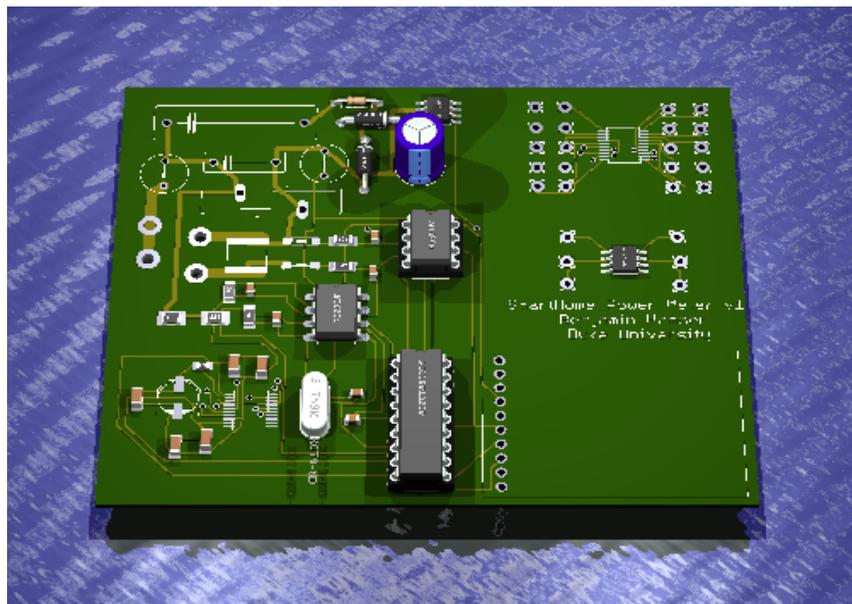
3-D rendering of the custom PCB layout along with most components.
